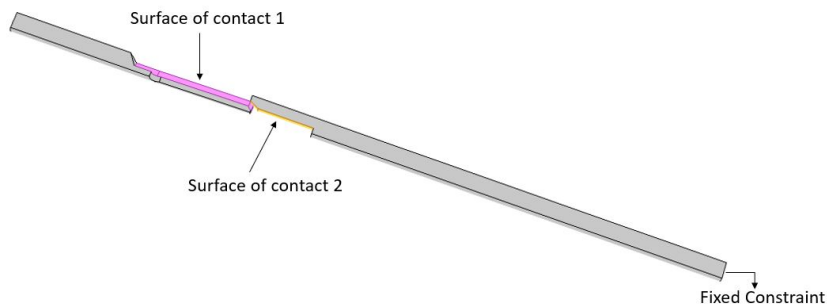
Final geometry used to simulate the contact between socket and pin.
